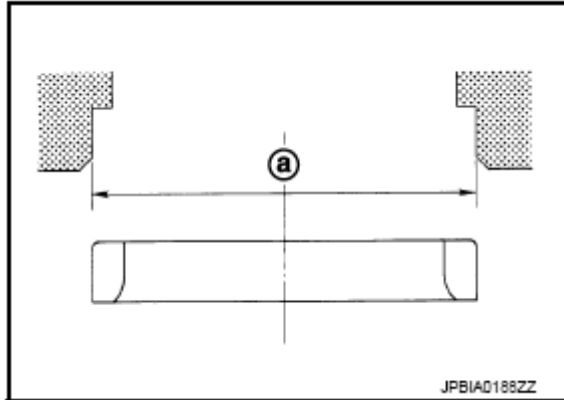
Identifying Recess Diameter Of Cylinder Head
